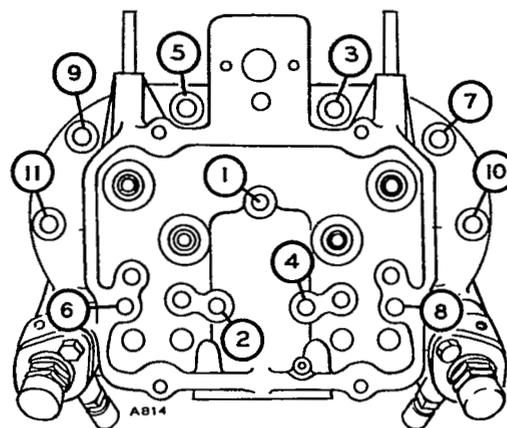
HEAD BOLT TORQUE SEQUENCE
